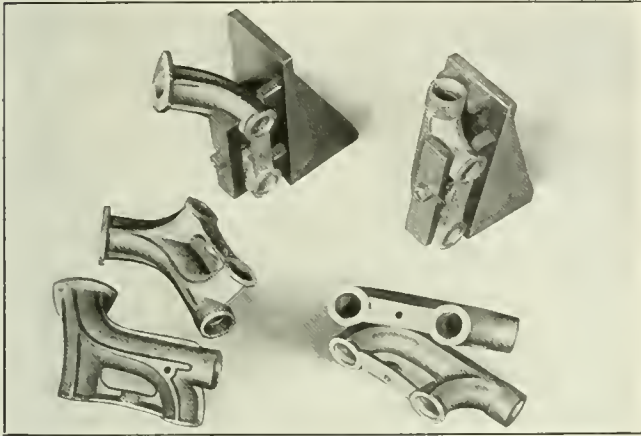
Milling Jigs for Two Different Shapes of Exhaust Manifolds
